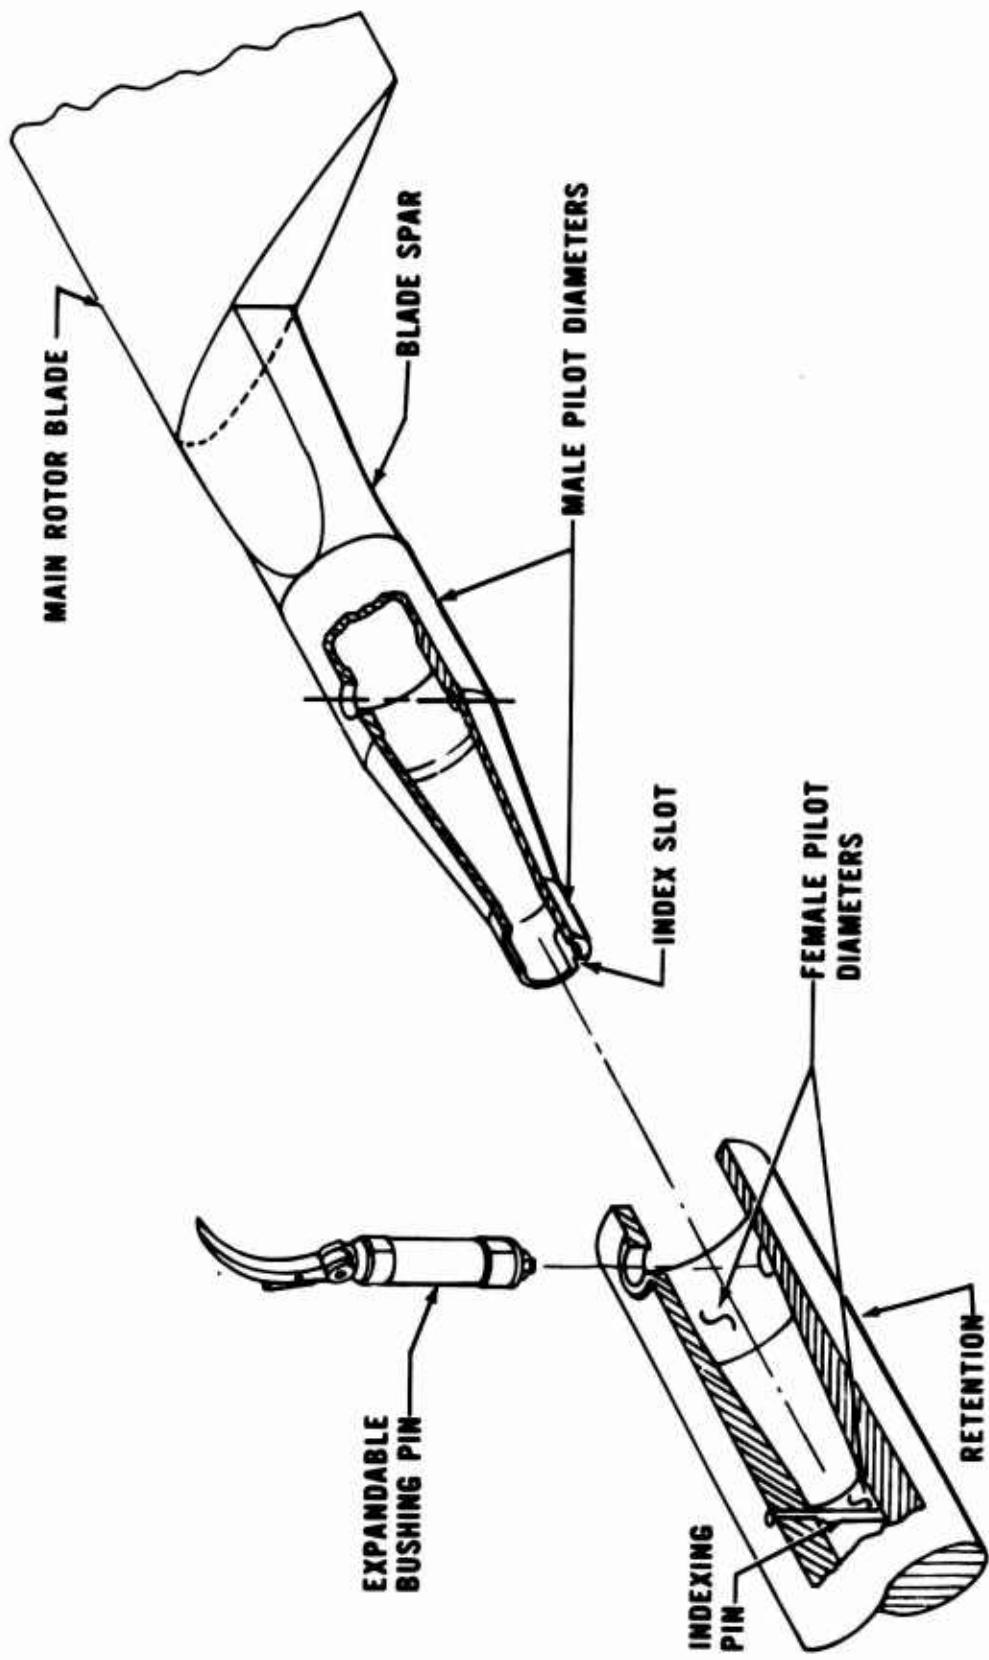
Quick Attach/Detach Mechanism for Main Rotor Blades.
